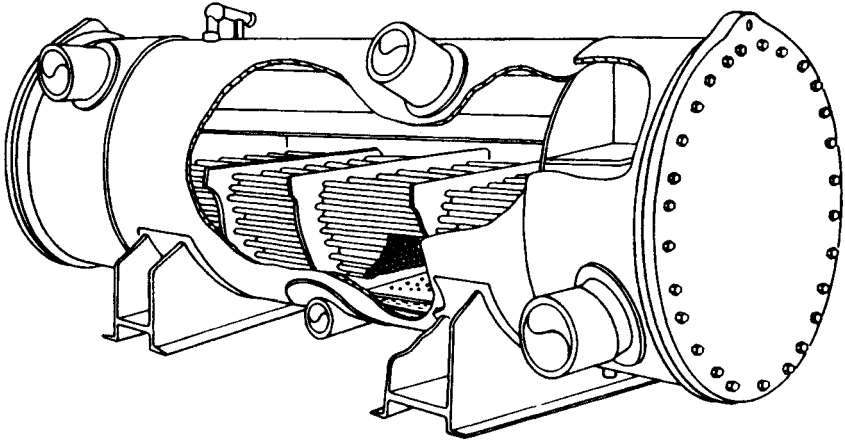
Typical fixed-tube-sheet evaporator.³
